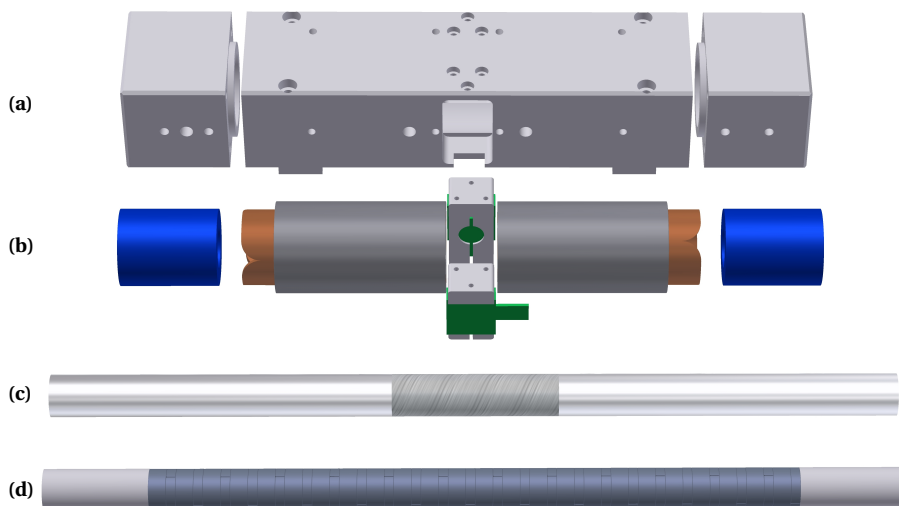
Exploded view of prototype of the 2-DoF actuator. (a) Aluminum housing consisting of central part to accommodate stator sections and encoder head, and two bearing housings at the sides. (b) Two stator sections with encoder heads in the middle and two air-bearings at each end. (c) Aluminum mover sleeve with sensor grid. (d) PM mover consisting of 12 pole pairs and two aluminum plugs at the ends.
